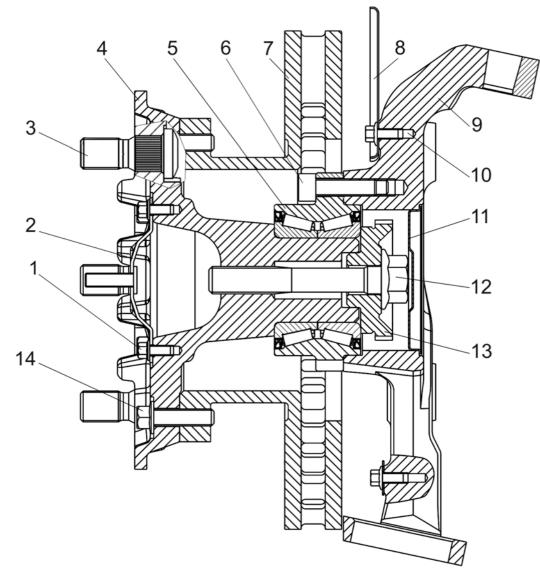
Strut with hub: 1, 10, 12, 14 – bolts; 2 – wheel cap bracket; 3 – hub bolt; 4 – hub; 5 – double-row taper roller bearing; 6 – screws; 7 – brake disk; 8 – front brake back plate; 9 – strut; 11 – plug; 13 – ABS rotor
